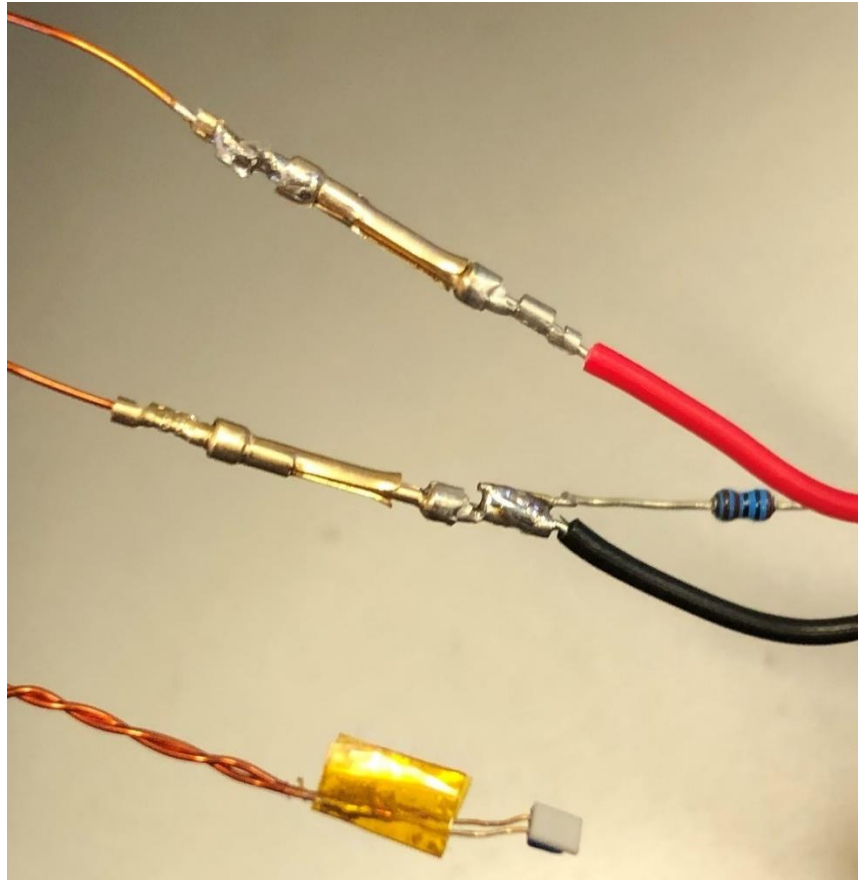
Kapton wire soldered to a PT100 sensor with D-sub female connectors. The connectors are connected to a test circuit to verify the cables are working.
